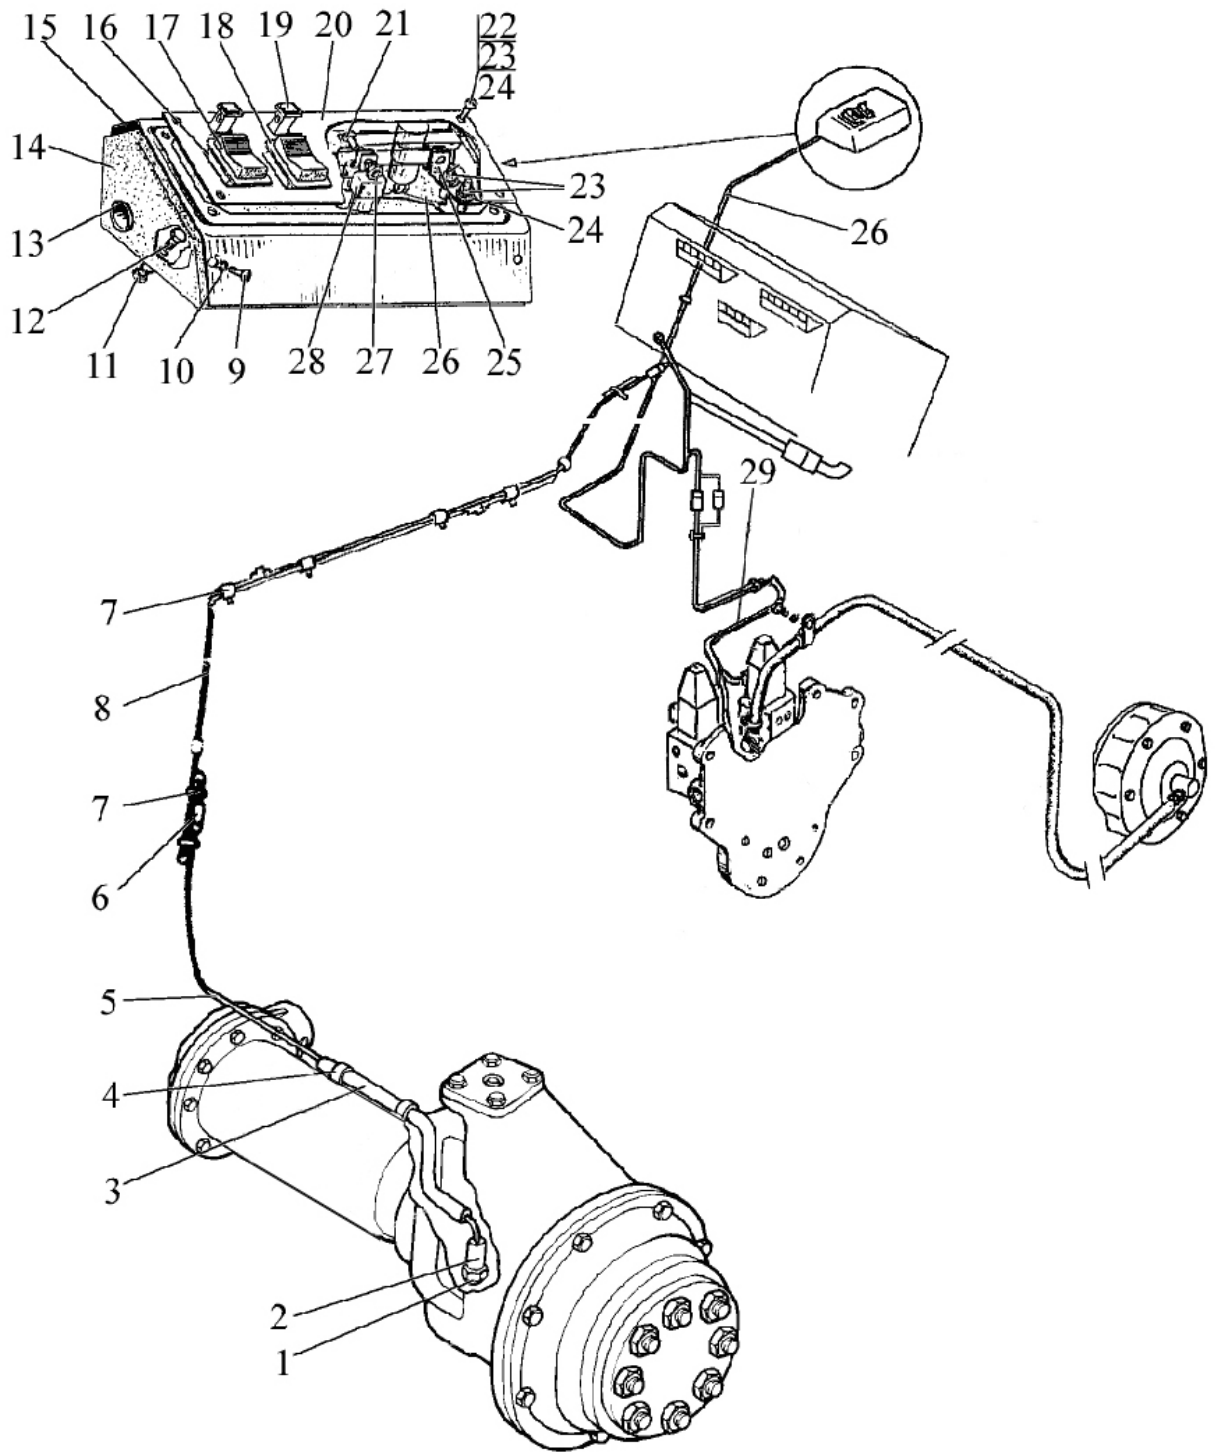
FDA (front driving axle) control and DL (differential lock) of rear axle control (1221-8700410-Д)
